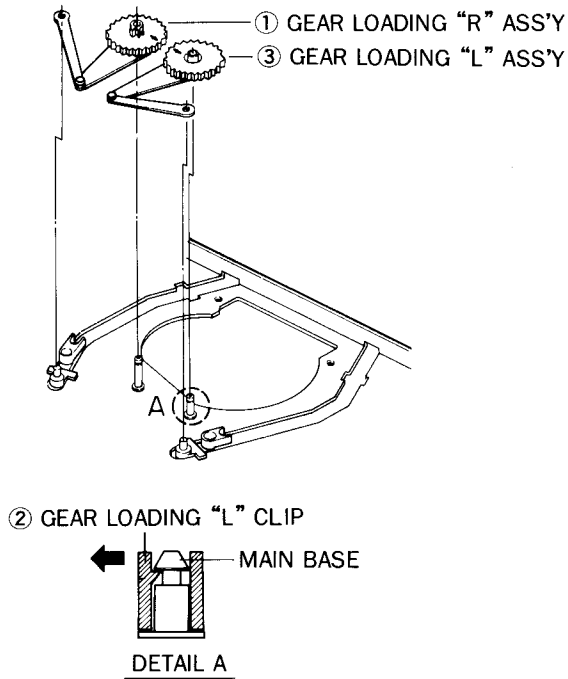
Gear Loading "L", "R" Ass'y Removal
